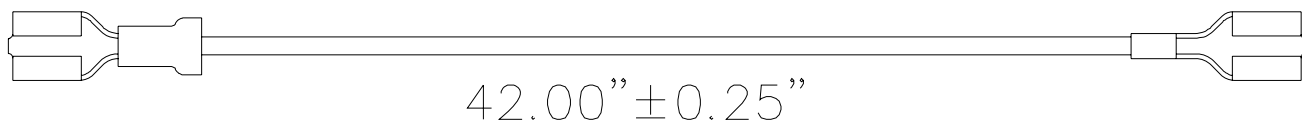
OT Switch to Backcap Interlok Cable Assembly
